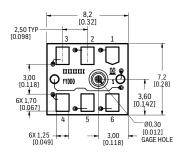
LEADLESS SMT PACKAGE DIMENSIONAL DRAWINGS (FOR REFERENCE ONLY: MM [IN].)
